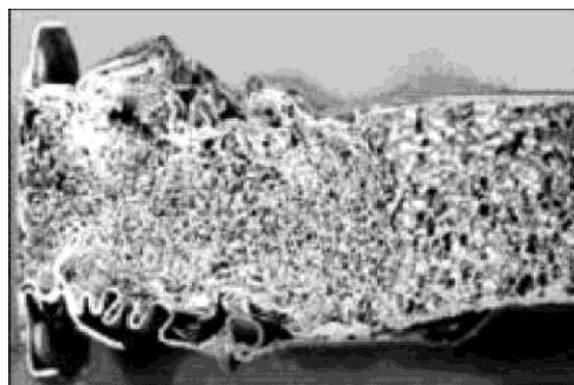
The motor carrier filled with aluminium foam after frontal impact [6]
